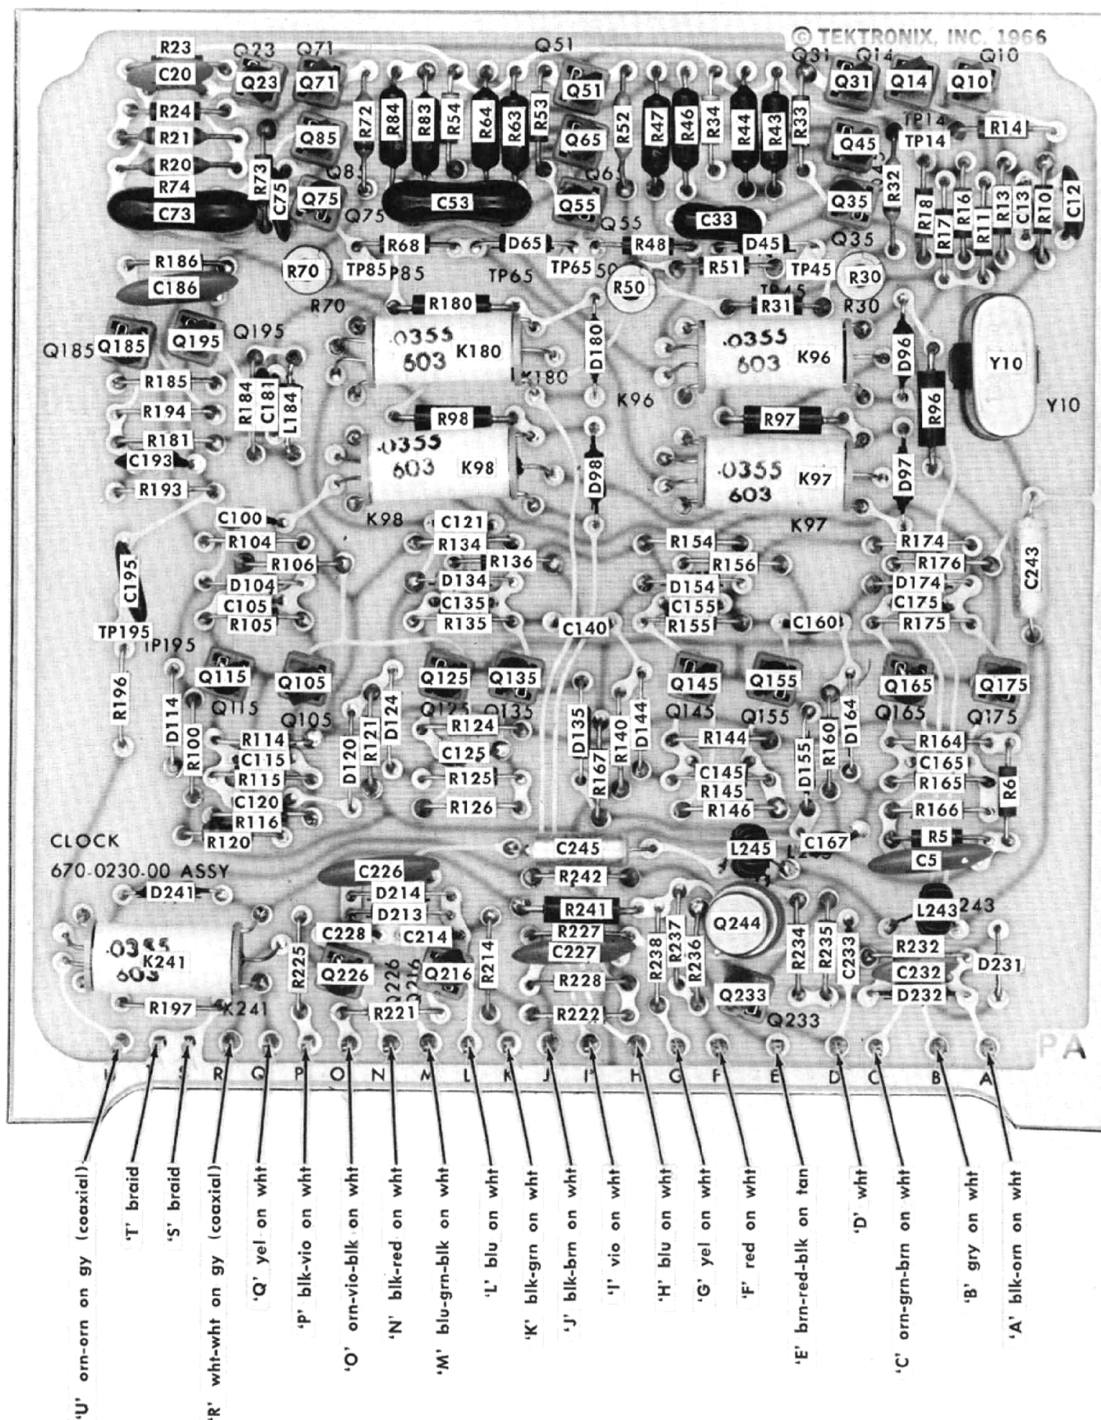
Location of parts on the Type 283/R283 circuit board.
